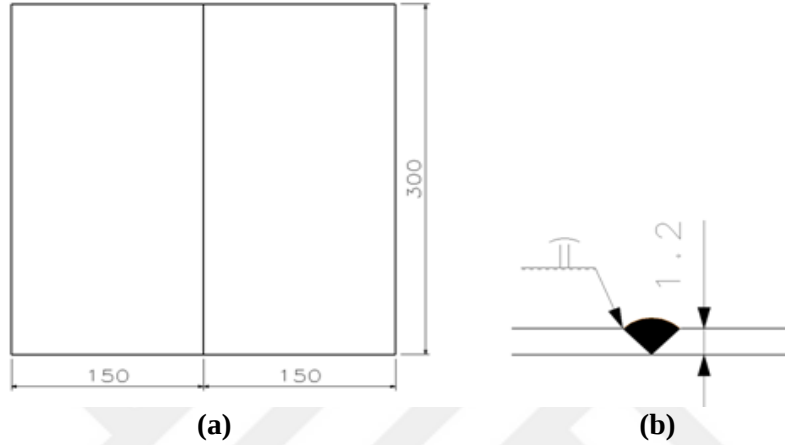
The welding design (a) Dimensions of welding samples (b) Cross-section of welding
